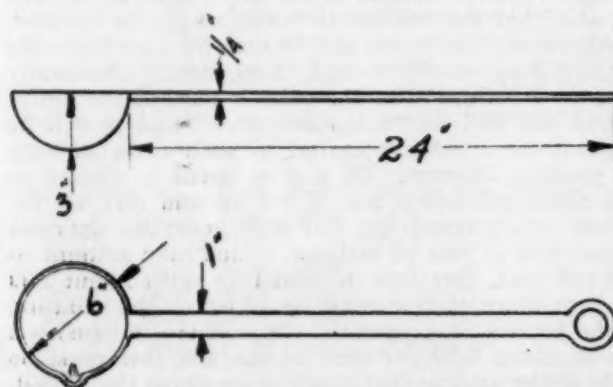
Small Hand Ladle, for Pouring and Skimming.
